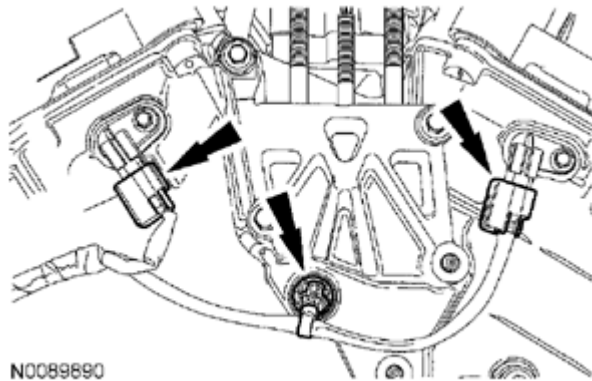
Locating Camshaft Position Sensor Electrical Connectors, Wiring Harness Retainer And Engine Front Cover Stud Bolt
